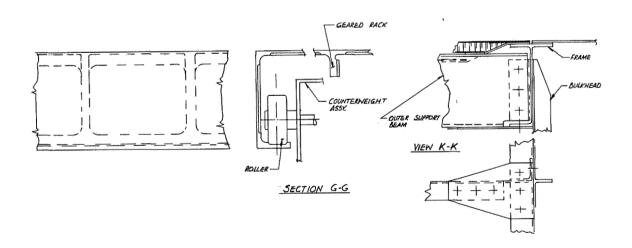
Centrifuge Structural Arrangement - Concept No. 1A
